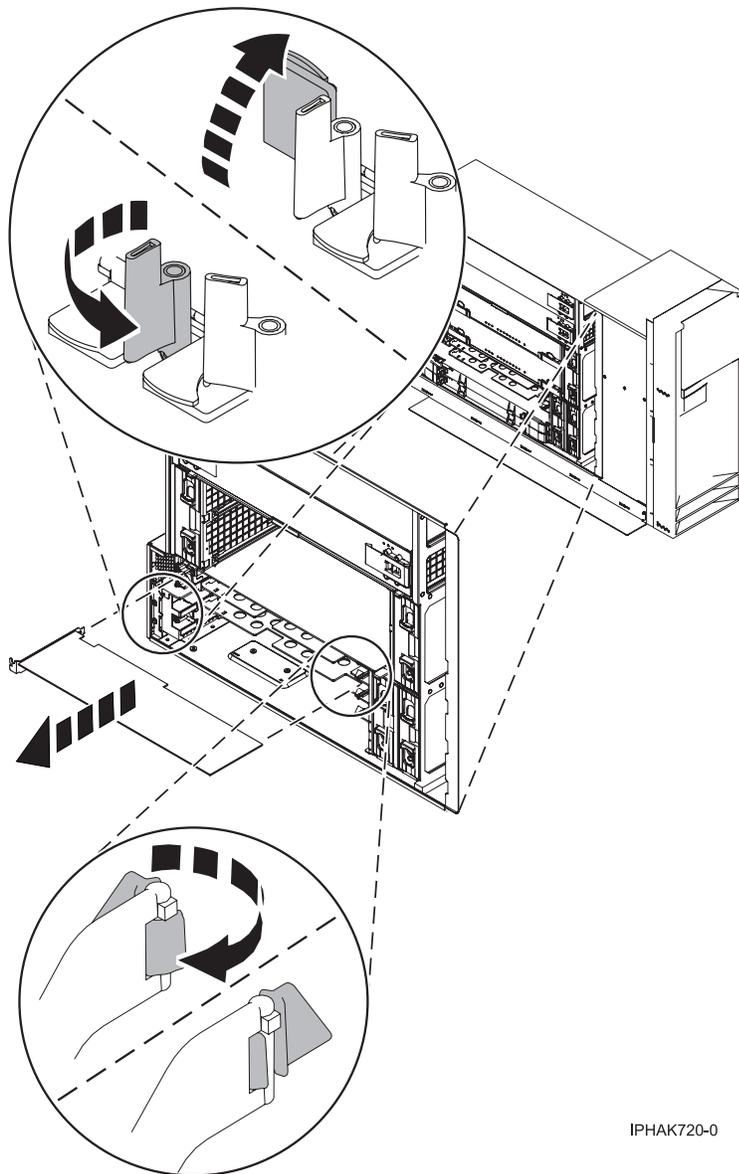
PCI adapter or filler plate removed from the rack-mounted unit
